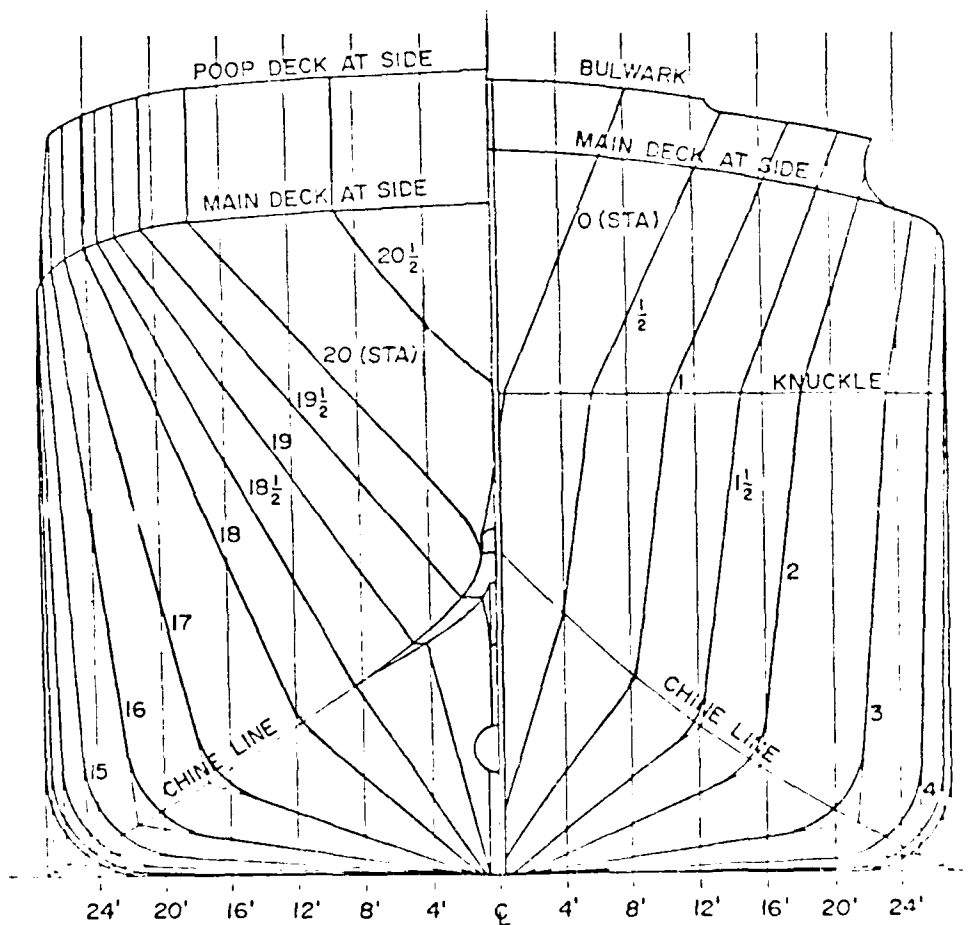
Body plan, typical U.S. Maritime Commission concrete hull.
